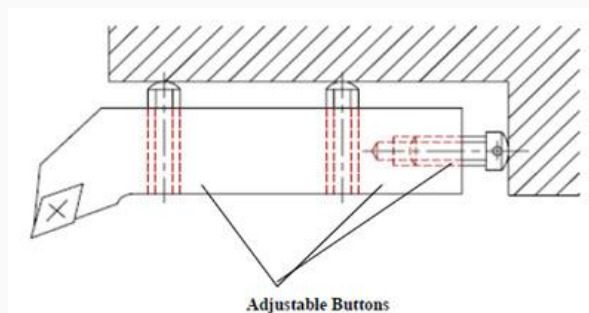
Semi-qualified Tooling for CNC Machines
